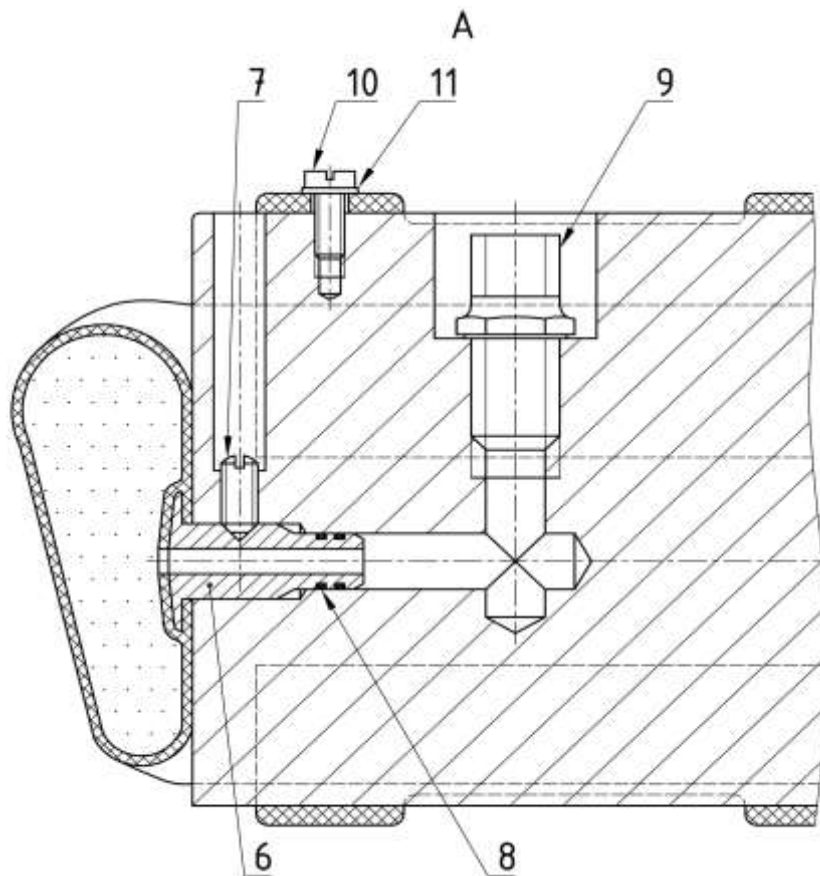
Pneumatic flexible shaft coupling with hose flexible element
